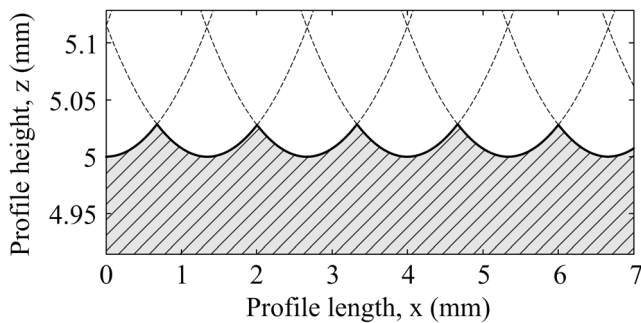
Surface topography which is formed by the tooth with the greatest radius vector, machining parameters: $d=10$ mm, $v=7.1$ m/min and $f=300$ mm/min
